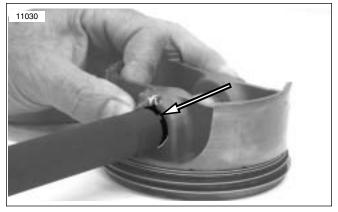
Insert Piston Pin Clip Installer with Tab Upward
